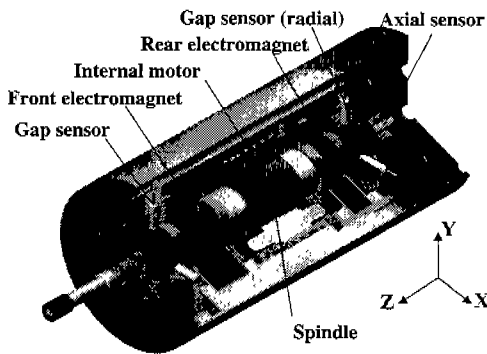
The high speed spindle system with cone shape magnetic bearing for internal grinding
